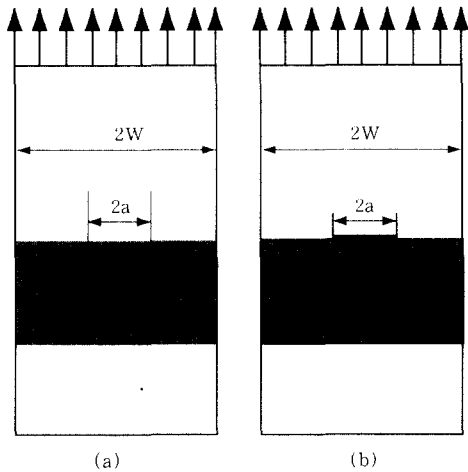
Mismatched plane strain middle cracked tension (m(T)) specimens and the relevant dimensions:(a) weld centre cracks and (b) interface cracks
